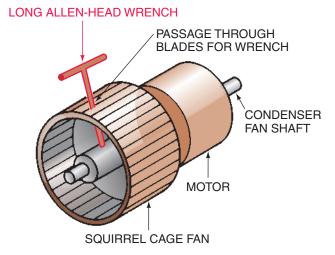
An Allen-head setscrew may be loosened by placing a long Allen wrench through the blades.
